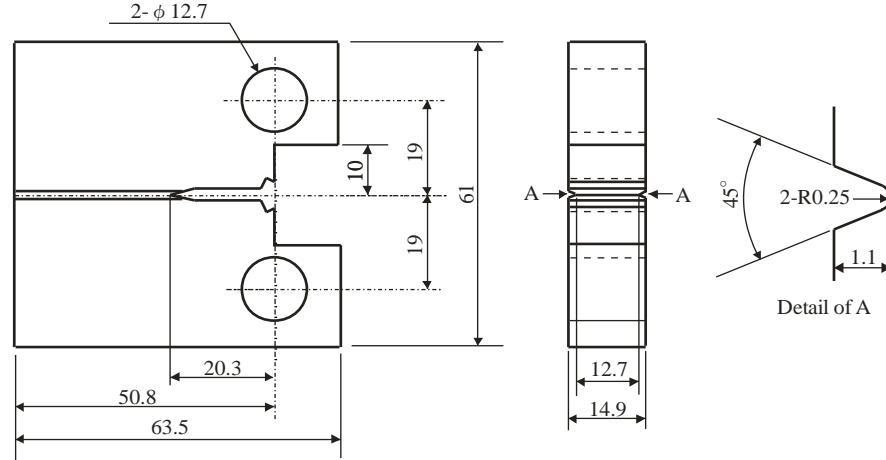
Shape and dimensions of the CT specimens used for fracture toughness tests.
